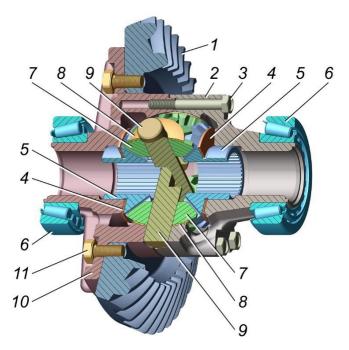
Differential assembly with driven gear: 1 – driven gear; 2– right differential spider; 3,11 – bolts; 4 – side gear washer; 5 – side gear; 6 – bearing; 7 – pinion gear; 8 – pinion gear washer; 9 – pinion gear axis; 10 – left differential spider.
